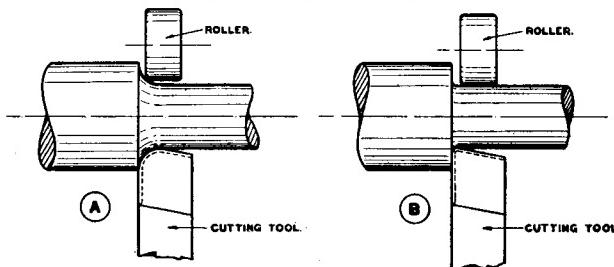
When setting steadies, care must be taken that they do not ride on the fillet produced by the cutting tool, as at A, but bear evenly on the work, as at B.
